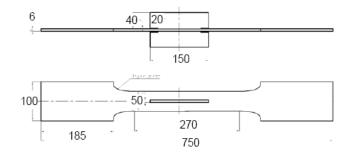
Specimen geometry for fatigue testing of 960 MPa yield strength steel welded elements [21]
